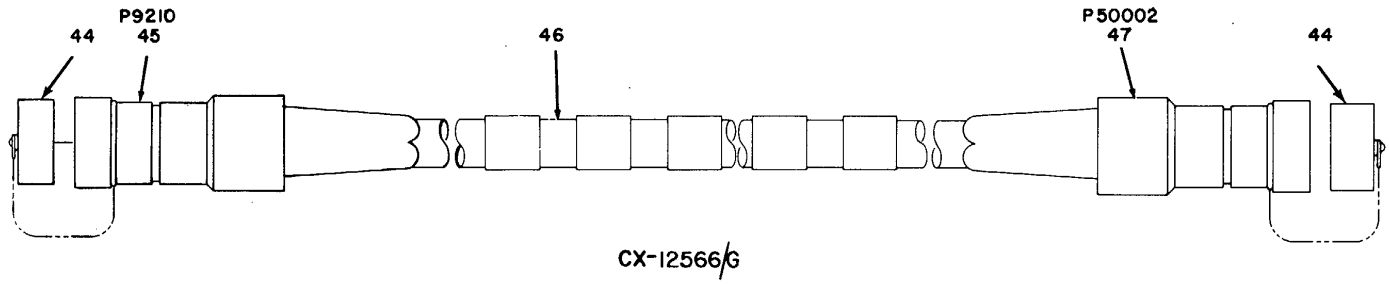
Cable Assemblies, RF and Power (Sheet 3 of 3).
